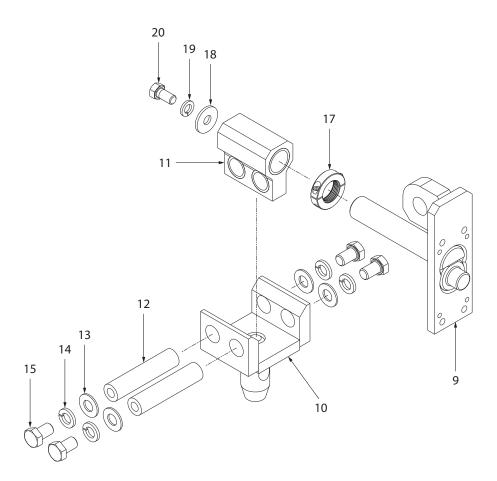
AGSE-E25950-S02 Adjustable FWD Mount Assembly - RH
